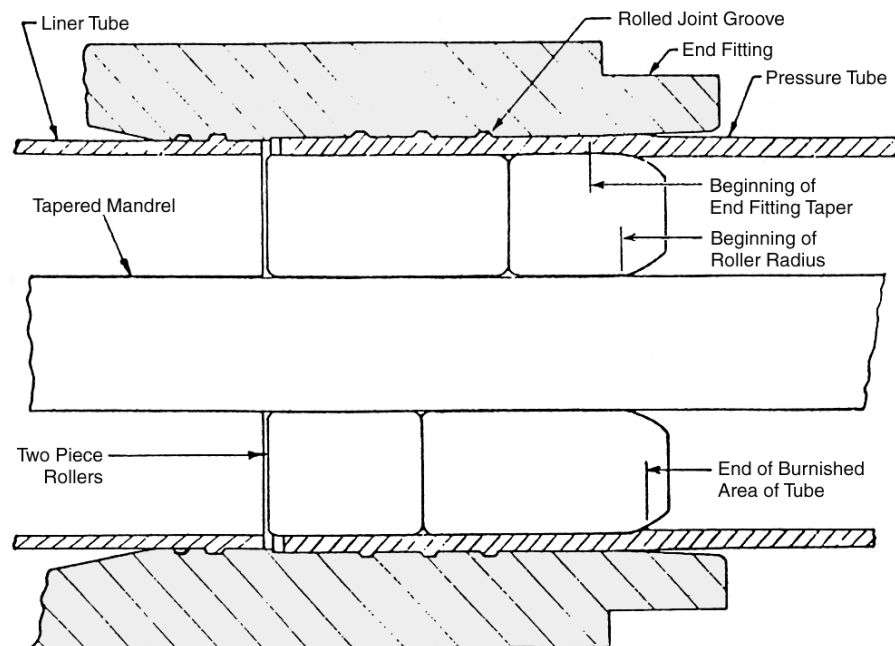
shows the cross section of a rolled joint. Three grooves are machined in the end fitting bore in the rolled joint area. The pressure tube is inserted into the end fitting covering the grooves. A tube expander is introduced into the pressure through the end fitting (see Figure 5.11). The tube is roll expanded into the end fitting. The tube wall thickness is reduced by 12% to 15% and the grooves in the end fitting are partially filled with tube material. The material in the grooves tends to lock the tube to the end fitting producing satisfactory leak tightness and axial strength. Although the rolled joints themselves have behaved well, improper rolling procedures during construction resulted in cracks close to the rolled joint.
